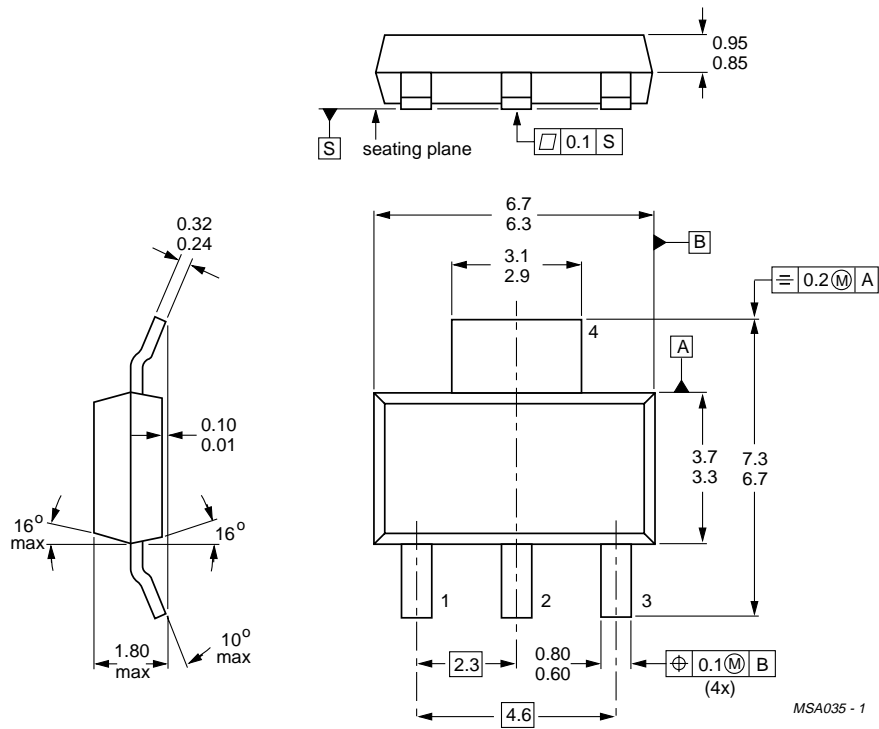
SOT223 surface mounting package<sup>1</sup>.
